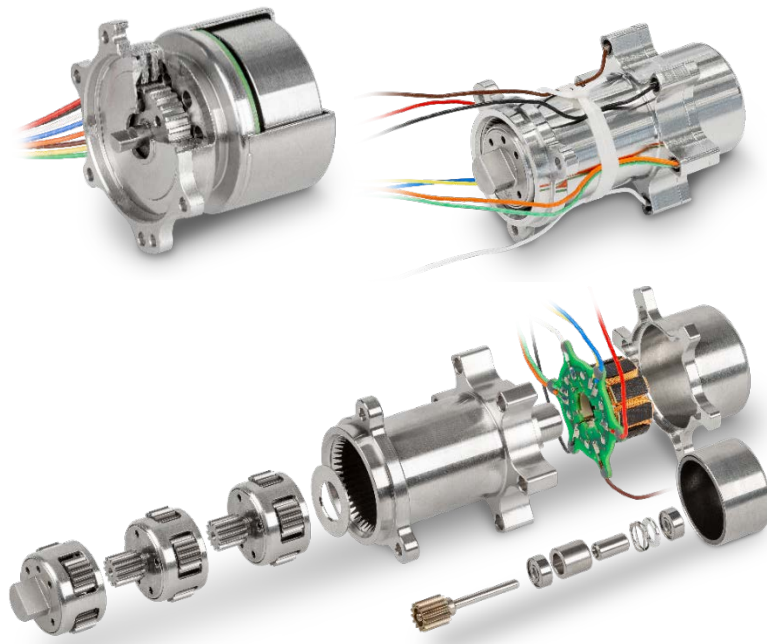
Top Left: M32 motor cut-away showing detent brake; Top Right: M20 FM gearmotor; Bottom: Exploded view of M20 gearmotor
